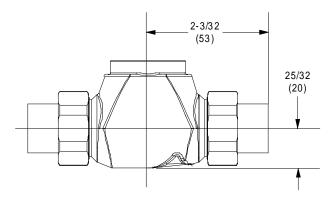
1/2 in. Normally Open Union Sweat VG7000 Series Bronze Control Valve Dimensions, in. (mm)
